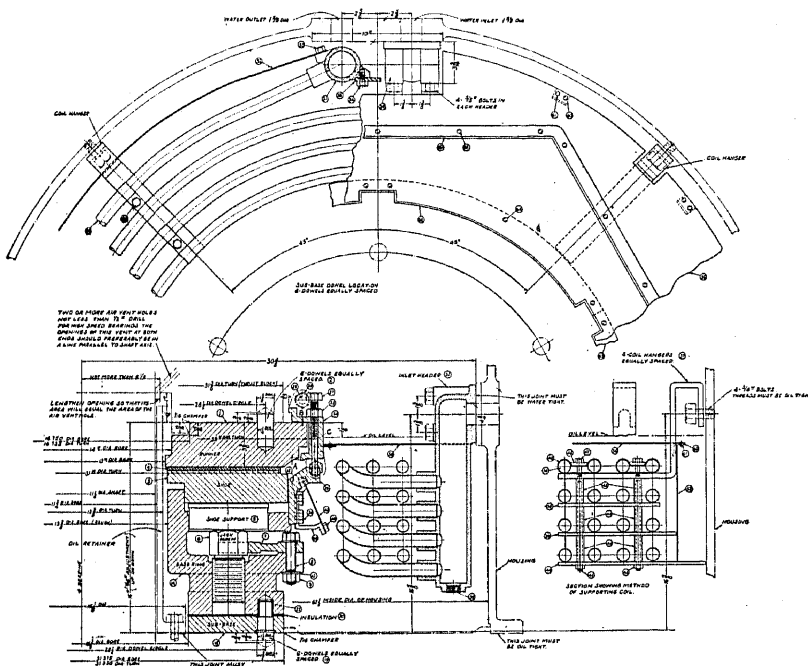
THRUST BEARING FOR 70,000-H. P. GENERATORS
